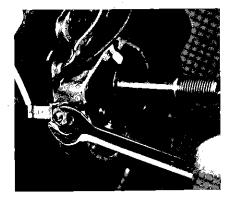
Remove the nut on the left side of the breaker point housing and disconnect the three wires on that threaded stud.
